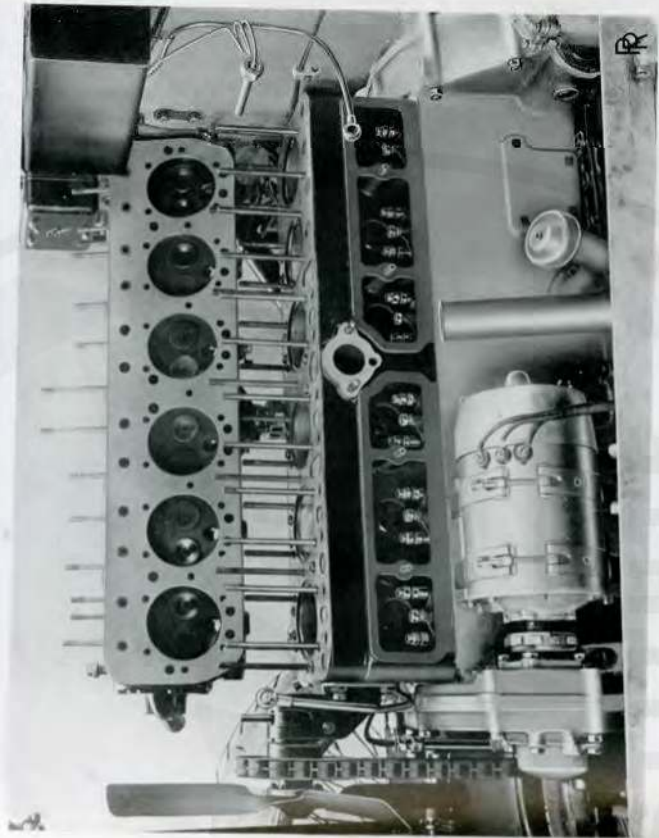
CYLINDER HEAD REMOVED FOR DECARBONISING.
